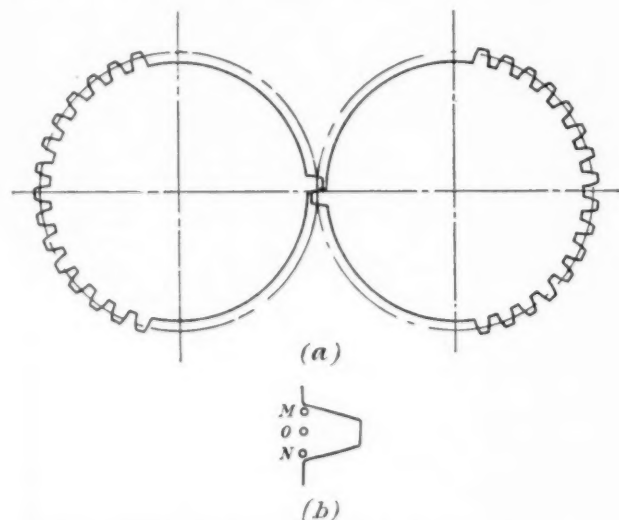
(a) 10-D.P. CELLULOID GEARS, HAVING NORMALLY 35 TEETH, USED FOR SINGLE-TOOTH TEST. (b) GEAR TOOTH SHOWING POINTS M AND N AT WHICH STRESS READINGS WERE MADE ($OM = ON = 0.8 \div D.P.$)
